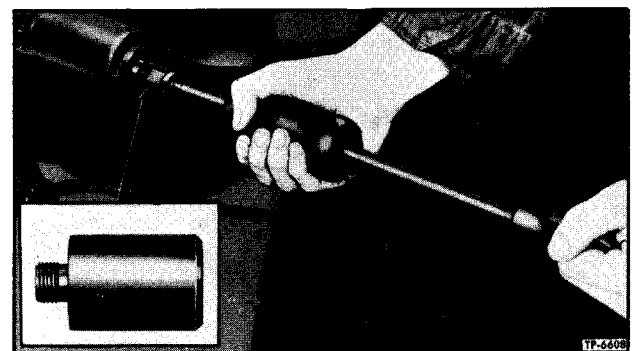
Removing Spring Pin or Bolt with Slide Hammer and Adapter
